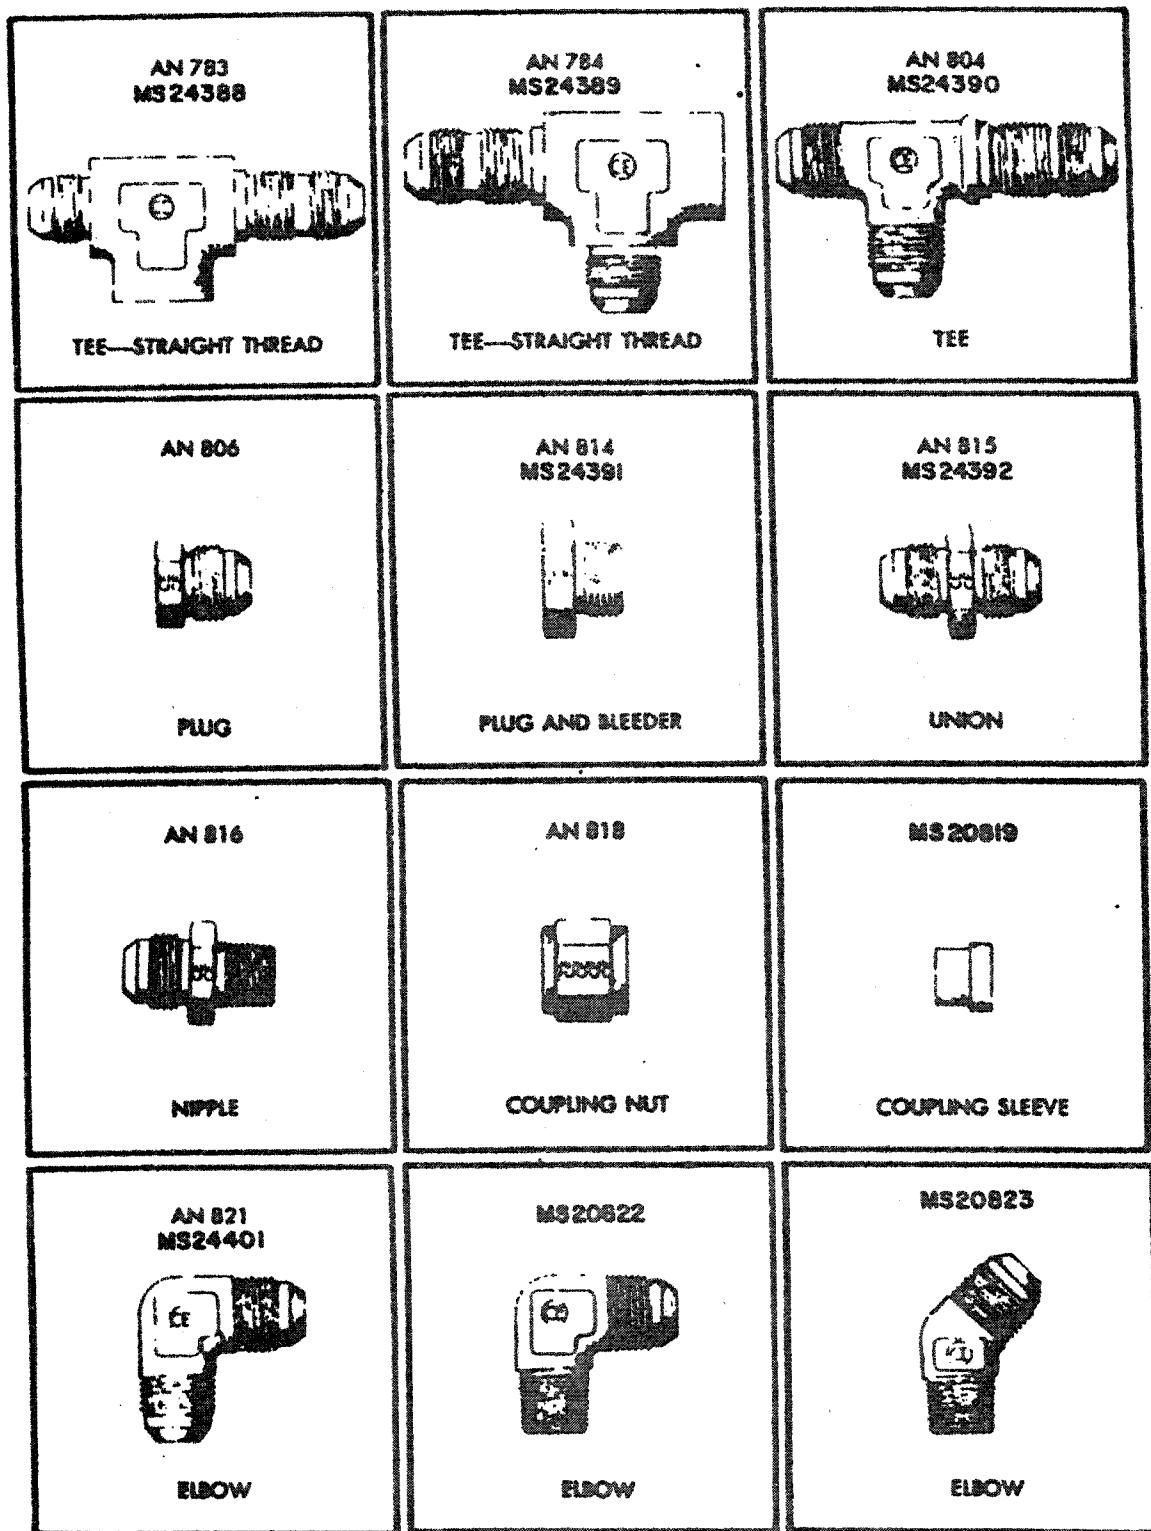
Tube Fittings (Sheet 1 of 4)
